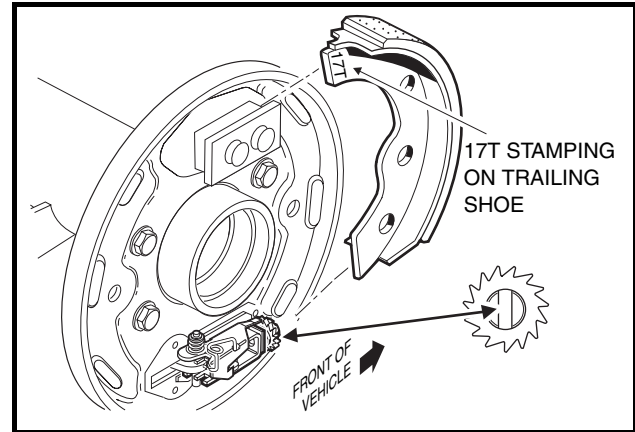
Install Adjuster Wheel, Trailing Shoe
